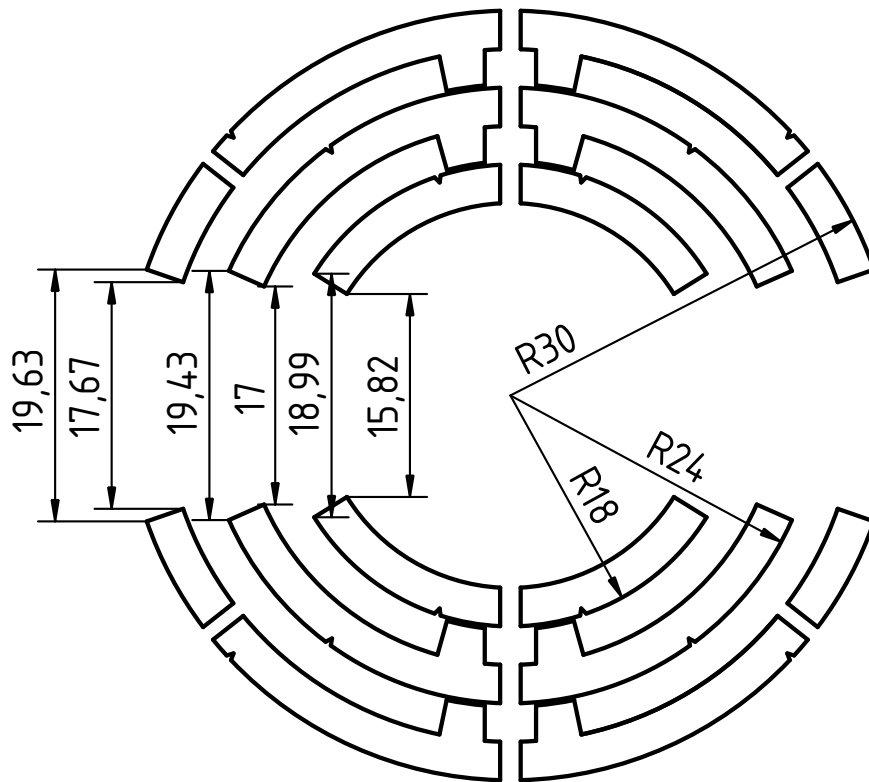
Cross section through the v1 and v2 3D-printed cylindrical jigs showing the opening of the various layers.
